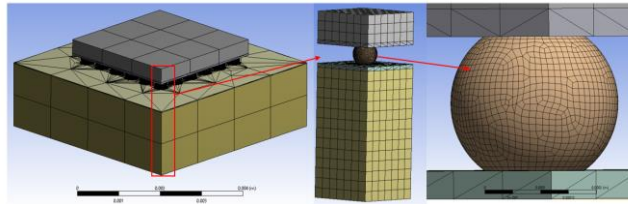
(a) SolidWorks CAD drawing containing BGA with 36 balls in a 6 x 6 matrix used for this research, and (b) ball view of WLP36T.5C-DC0667D SAC solder joints model designed with SolidWorks
